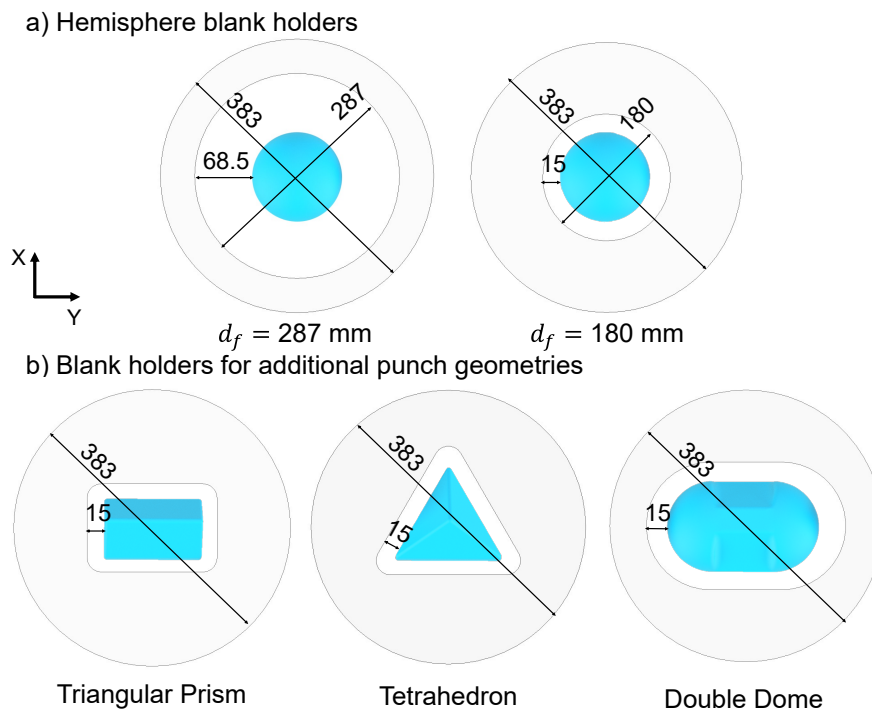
a) The two blank holders used with hemisphere punch geometry, with inherited blank holder (left) having a forming diameter (d_f) of 287 mm and the new blank holder (right) having a d_f of 180 mm. b) The blank holders designed for the additional three punch geometries investigated. The distance between the outline each of geometry and the inner blank holder perimeter is constant at 15 mm. All dimensions shown are in mm and the blank holders are all made out of 10 mm Perspex.
